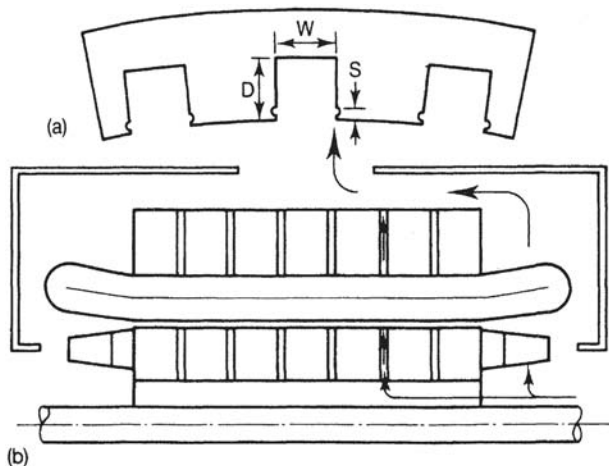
presents a sketch of an induction motor. View (a) shows the stator punching configuration. View (b) shows the motor in axial cross section. This view includes the motor rotor, the motor stator, and the motor air flow within the enclosure. The stator punching configuration of (a) shows the yoke, stator slot, and stator tooth, with  $D$  being the depth of the slot and  $W$  being the width of the slot.  $S$  is the setback from the stator bore to the edge of the wedgegroove. Table 12.6 provides technical information for this motor. This motor is representative of a motor that was tested thermally for a large number of operating modes. The motor and tests have been described by Martiny et al. [13]. The data are readily available to use for analysis, and for this reason this motor was chosen to illustrate several points in this section. Although the motor has six air ducts, it will initially be assumed that the machine has no air ducts. Thus, the only air flow is that which passes the end-turn regions and thence around the back of the core. For thermal evaluation, it is advantageous to take advantage of the machine symmetries. The motor stator is symmetrical from a heat transfer perspective from the machine
